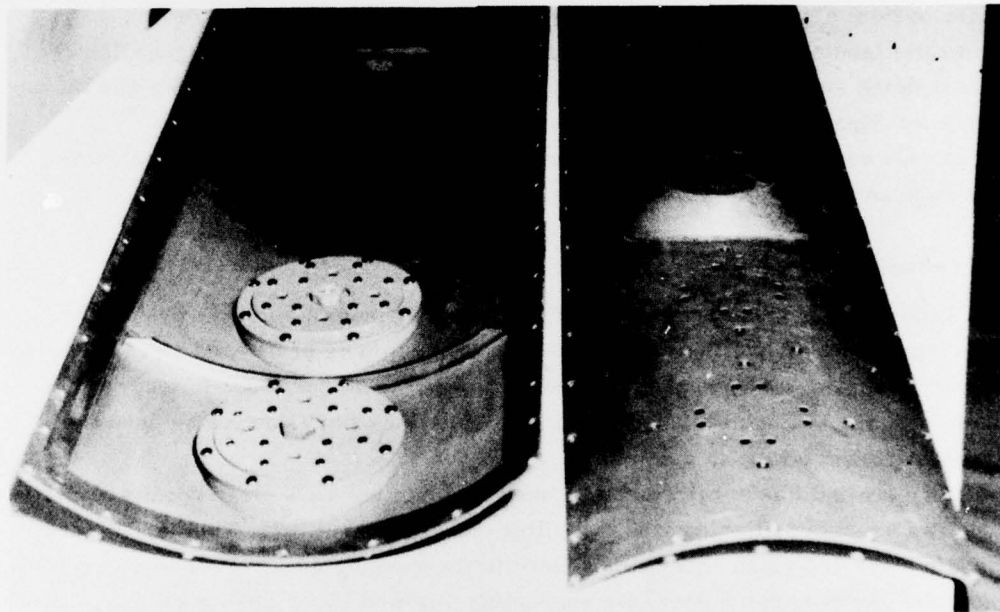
Payload Sensor Section Side Panels. The cylindrical mountings contain the Millipore filters
